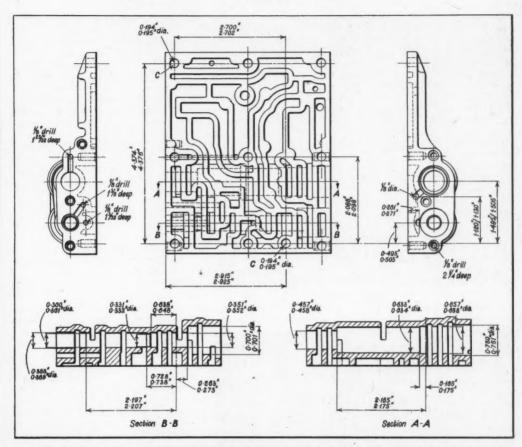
The upper valve body, which is here shown in plan, end elevation and section, has two stepped bores to house the valve plungers
